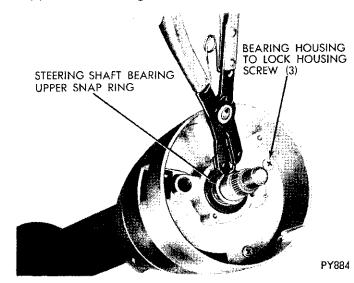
Steering Shaft Bearing Upper Snap Ring
